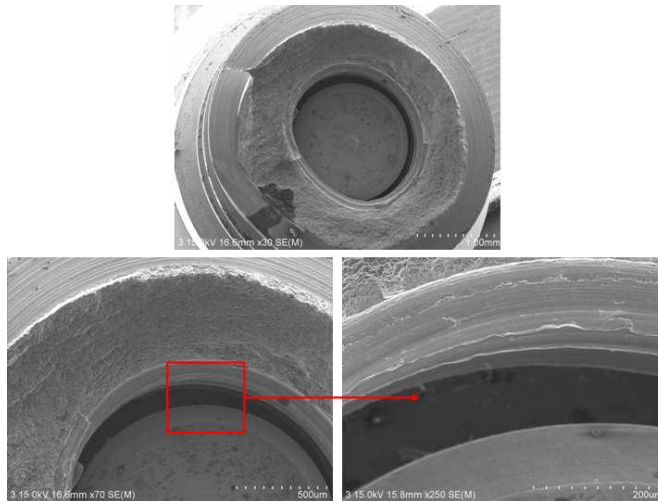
FE-SEM showing fractured WC coated implant system surface after 1 time tightening/loosening and corrosion test.
